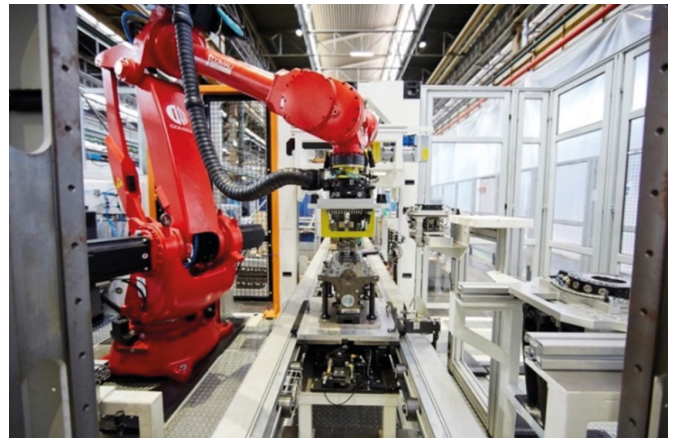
Cylinder head assembly line (courtesy of COMAU)
